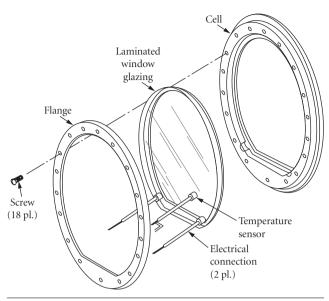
Exploded view of a heated window assembly used in a military application. (*Courtesy of Goodrich Corporation, Danbury, CT.*)
